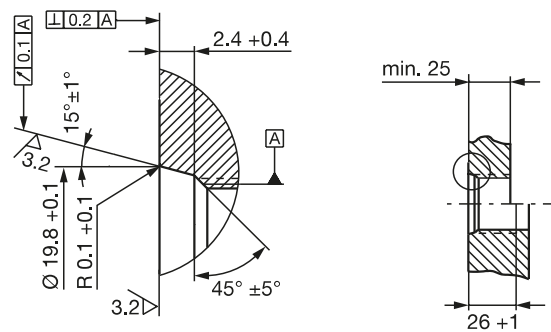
Mounting hole M18x1.5 per ISO 6149 O-ring 15.4x2.1
